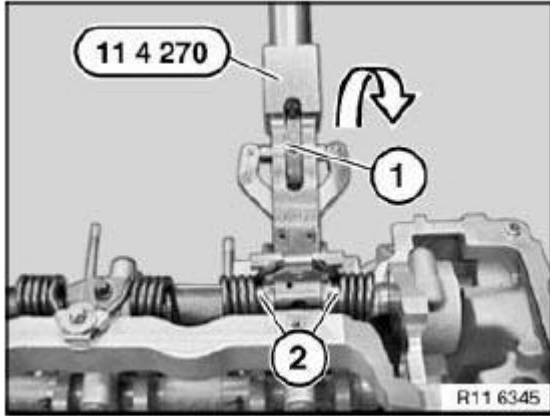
Identifying Bearing Pins And Knurled Screw With Special Tool (11 4 270)
